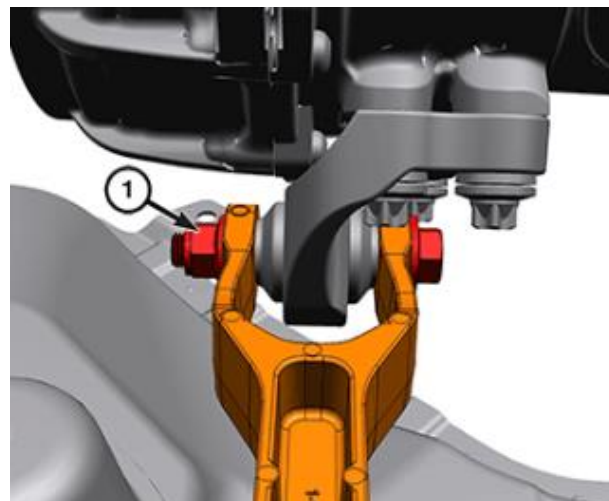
Rear Isolator to Engine Mount Bracket Bolt and Nut
